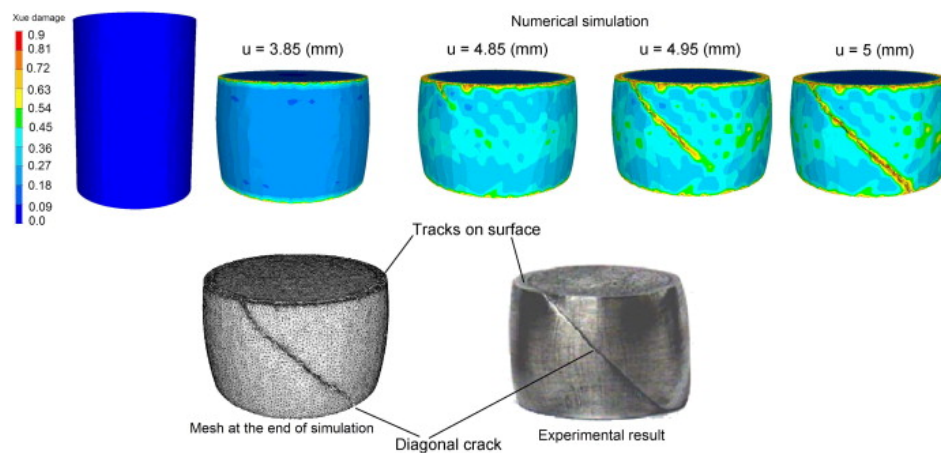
Initiation of internal cracks during the forward extrusion process [12]; diagonal crack is formed within the billet during the compression of an aluminium cylinder [10].
